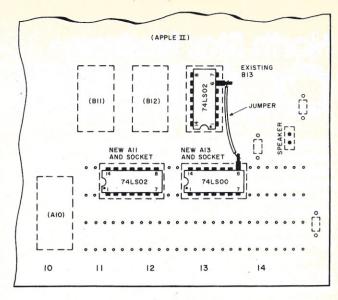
Top view of lowercase modifications. Jumper shown eliminates the need for foil cut.
